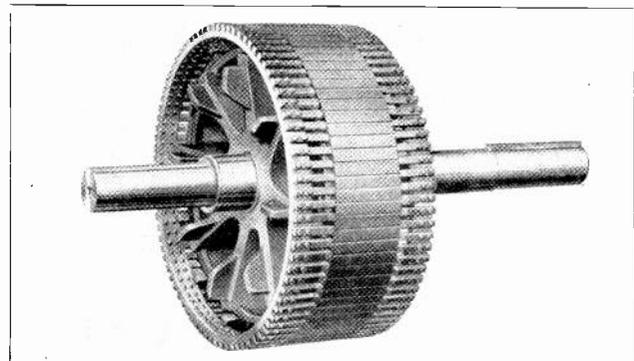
A. This photo shows an excellent view of a squirrel-cage rotor using square bars which are riveted to heavy end rings.
